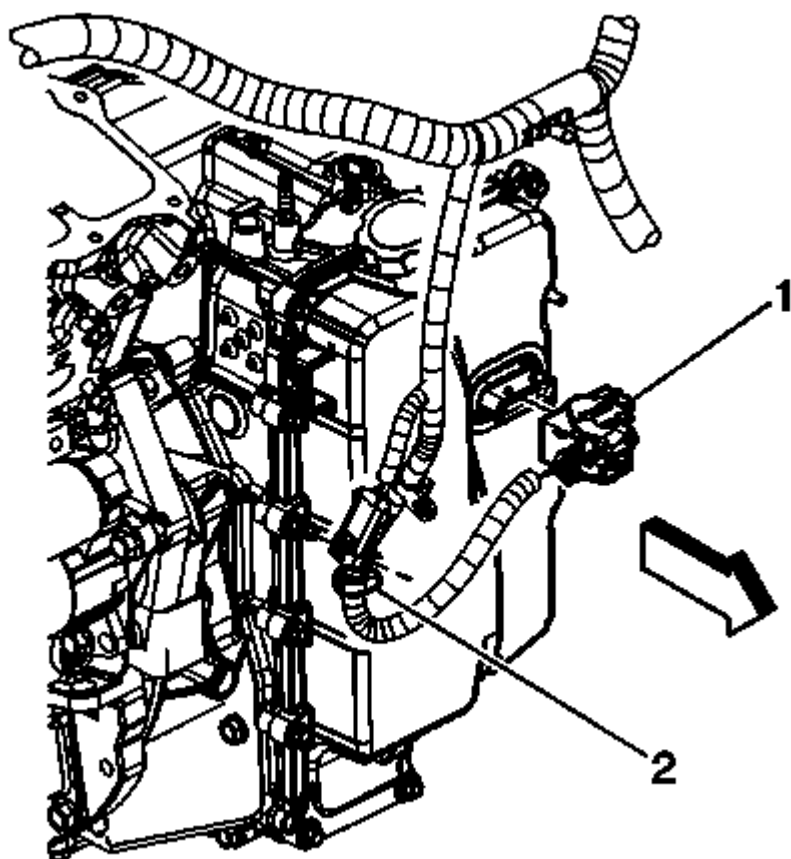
Identifying Wire Harness Retainer & TCM Electrical Connector
